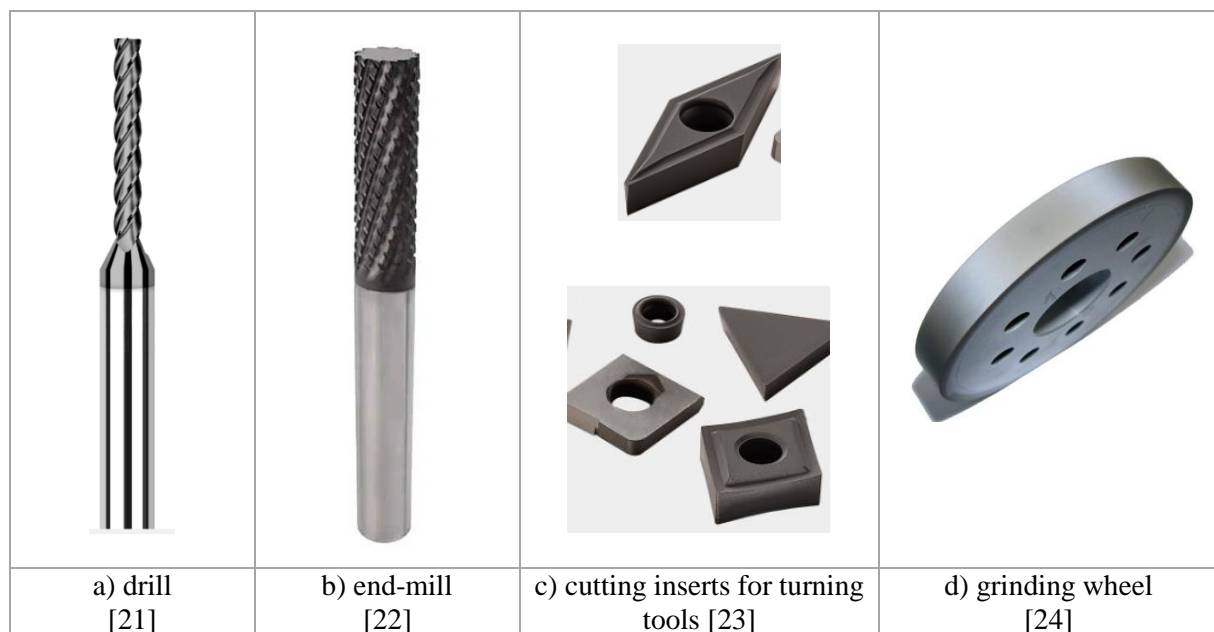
Examples of CVD-produced PCD coatings on different cutting tools.
